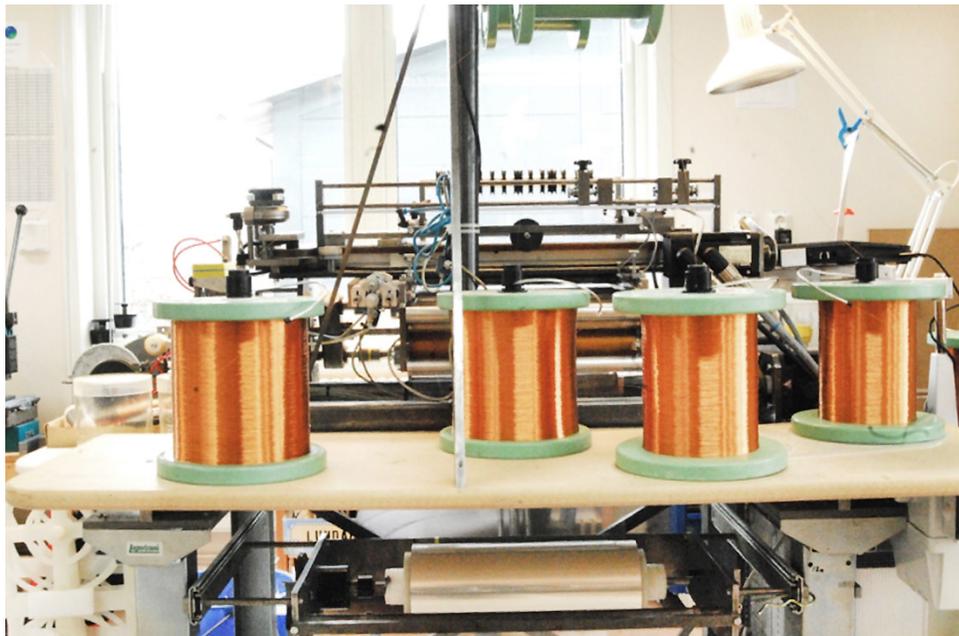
Rear view of large-format Lundahl coil-winding machine showing wire spools.
